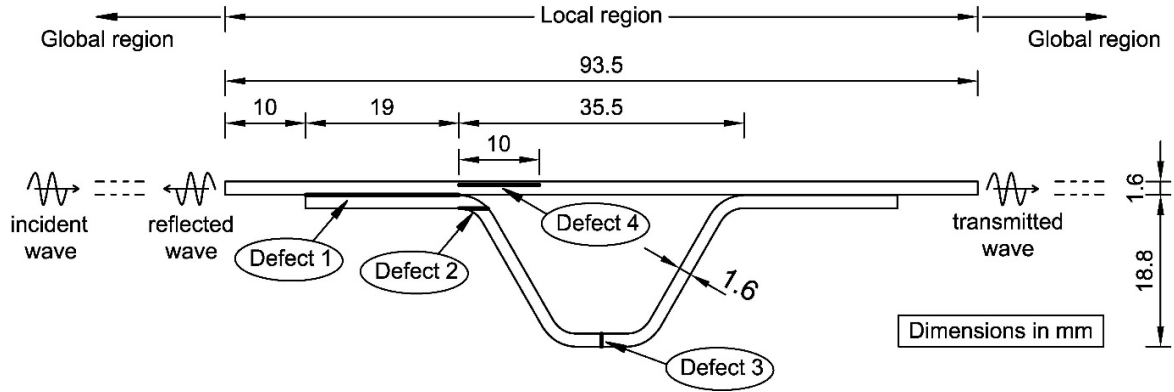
Global-Local model of the composite skin-to-stringer assembly, with the four “defected” configurations: delamination between skin and stringer (Defect 1), horizontal fracture in the stringer heel (Defect 2), vertical fracture in the stringer cap (Defect 3), and delamination between 2nd and 3rd laminae in the skin (Defect 4).
